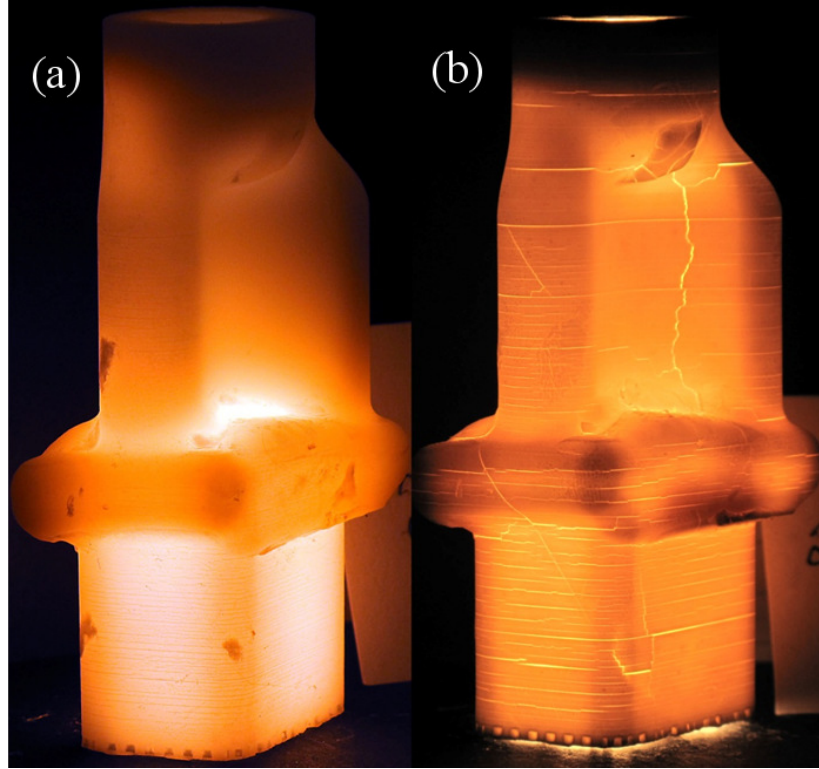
Example of cracks that form during binder burnout and sintering. (a) represents the mold green body prior to binder burnout and (b) is the mold after binder burnout and sintering [10].
